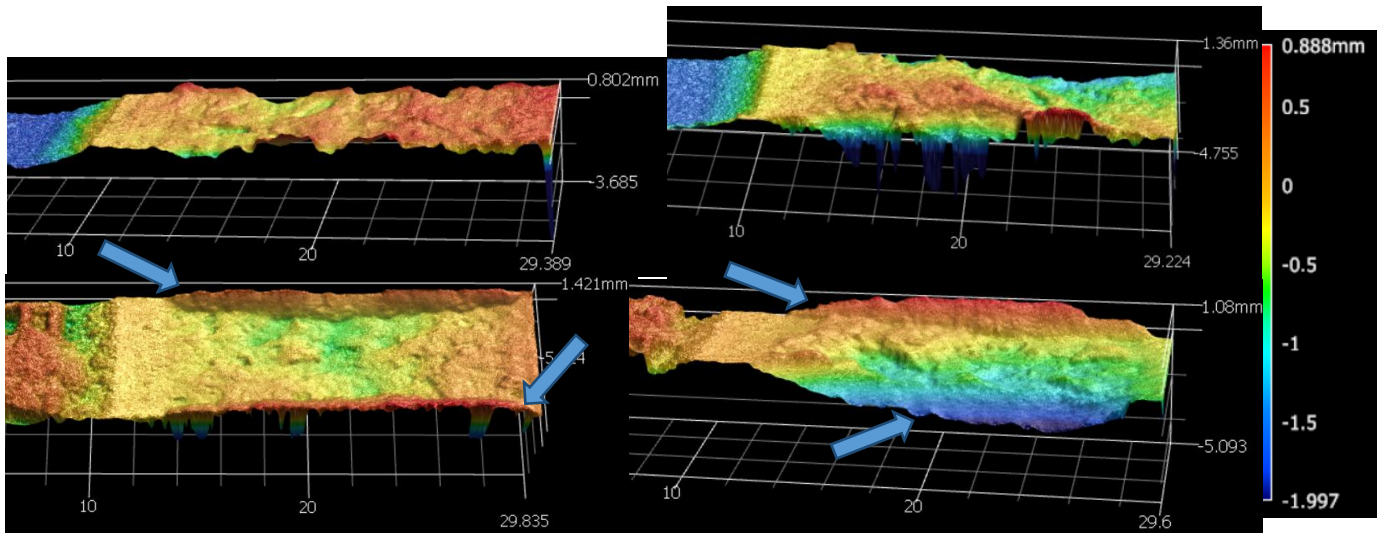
Selected 3D profile renderings of fracture surfaces of 0 (top left), 30 (top right), 60 (bottom left), and 90 (bottom right) degree oriented specimens demonstrating shear lipping at higher orientations
